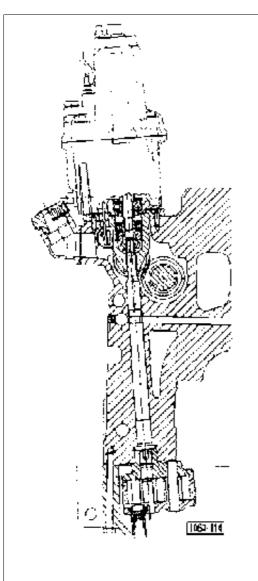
Engine-mounted governor unit. (For engine 4-cylinders with governor mechanical type).
